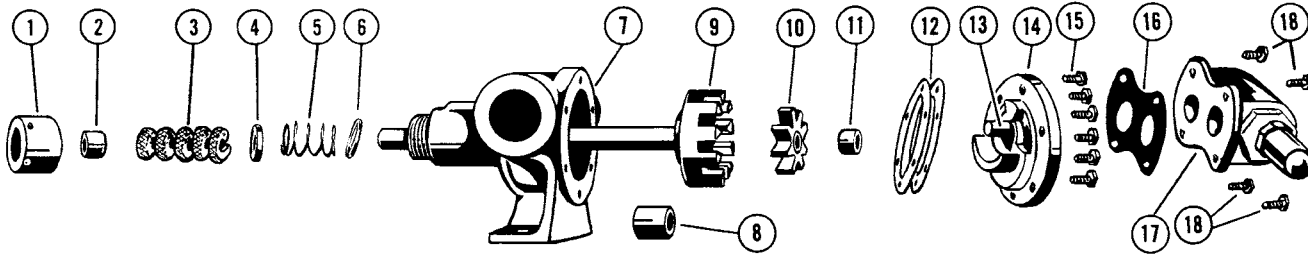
EXPLODED VIEW MODEL G32 PUMP
